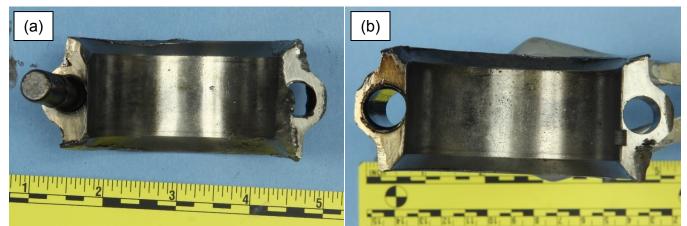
The bearing surfaces of the #2 (a) connecting rod cap and (b) the connecting rod.
